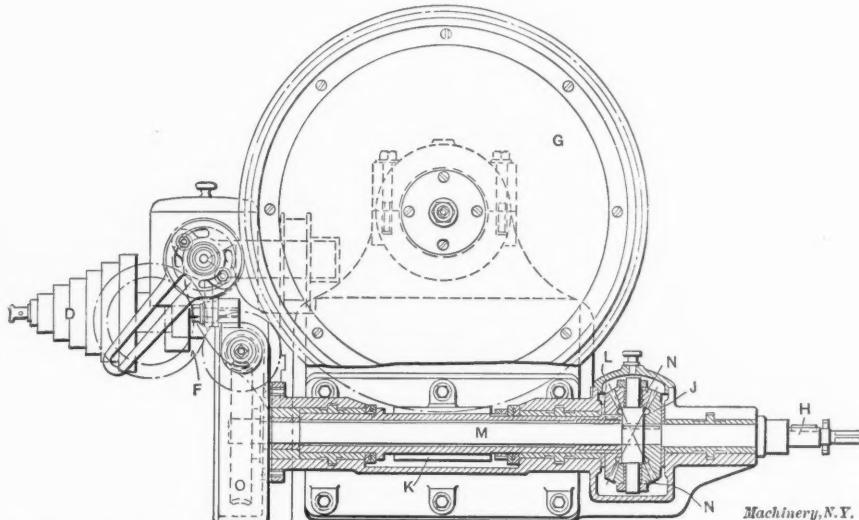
Detail of the Machine in Fig. 85, showing the Differential Mechanism by which the Motions for Helical Cutting and for Indexing are combined to Rotate the Work.
